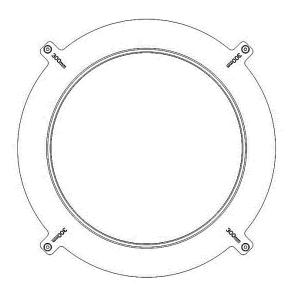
Apogee™ Mechanical Debonder Chuck Assembly
